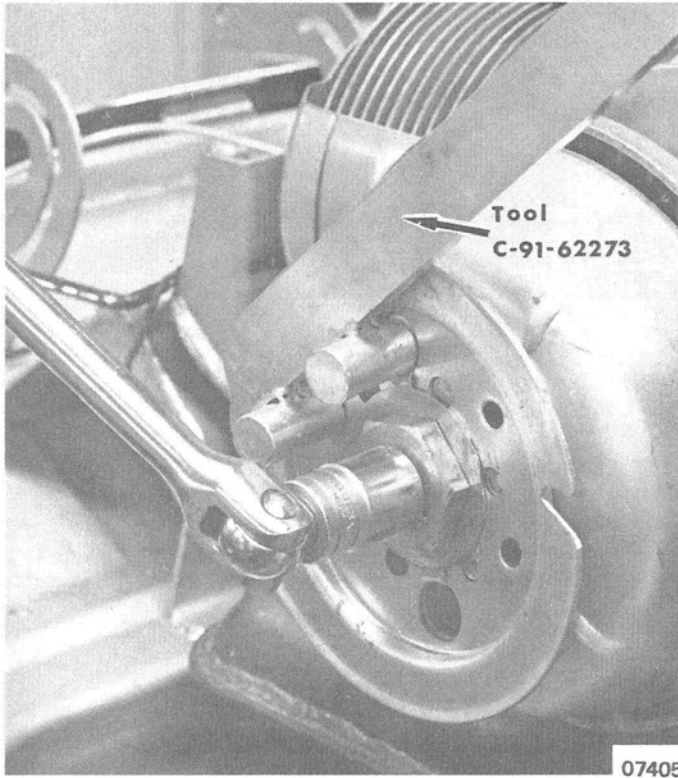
Holding Drive Sheave with C-91-62273 Tool
